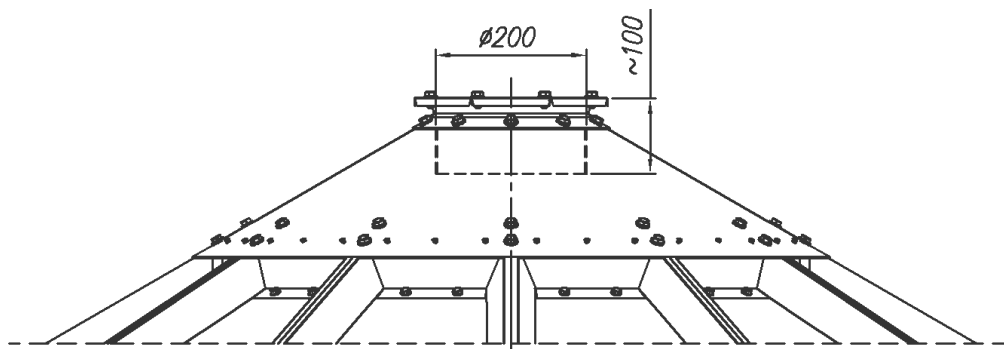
A diagram showing a central loading inlet together with conditions and options for connecting loading equipment to the collar of silos of the BIN10, BIN20, BIN40 and BIN60 type.
